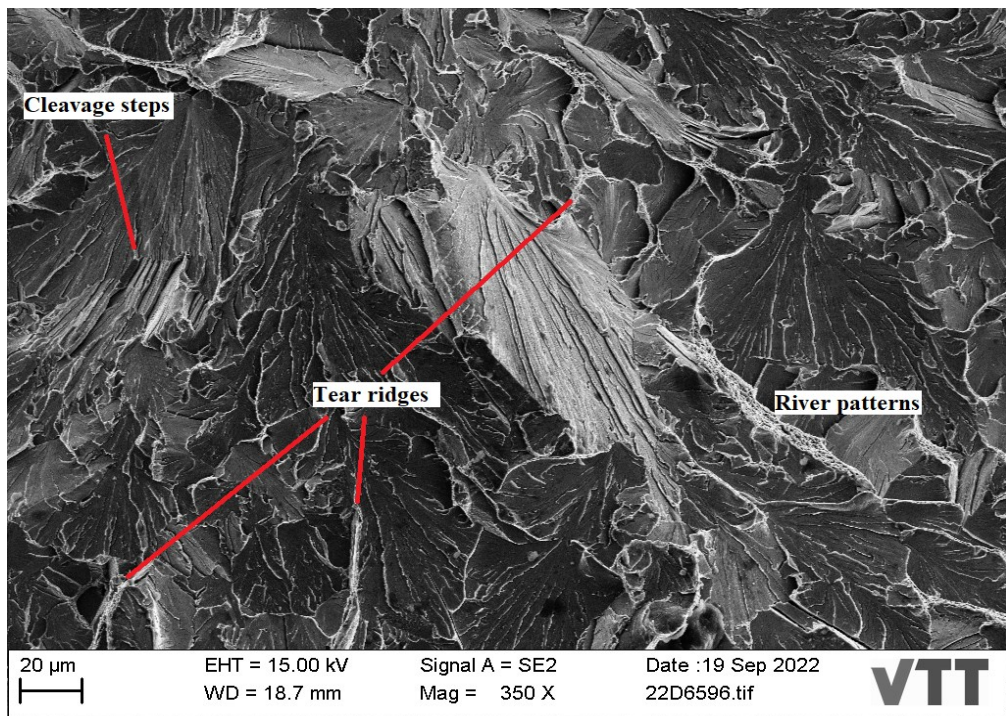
Tear ridges, cleavage steps, and river patterns highlighted on the fracture surface.
